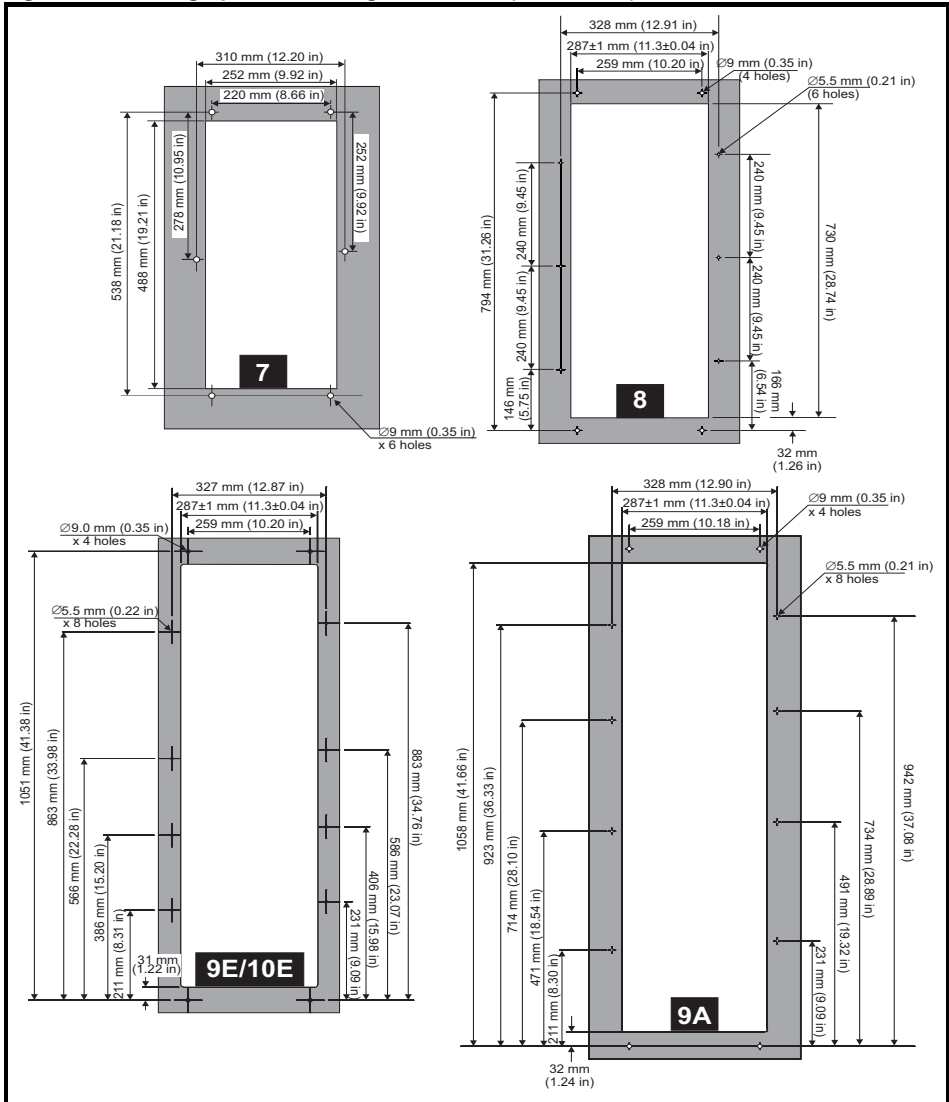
Surface mounting dimensions (size 7 to 10)
